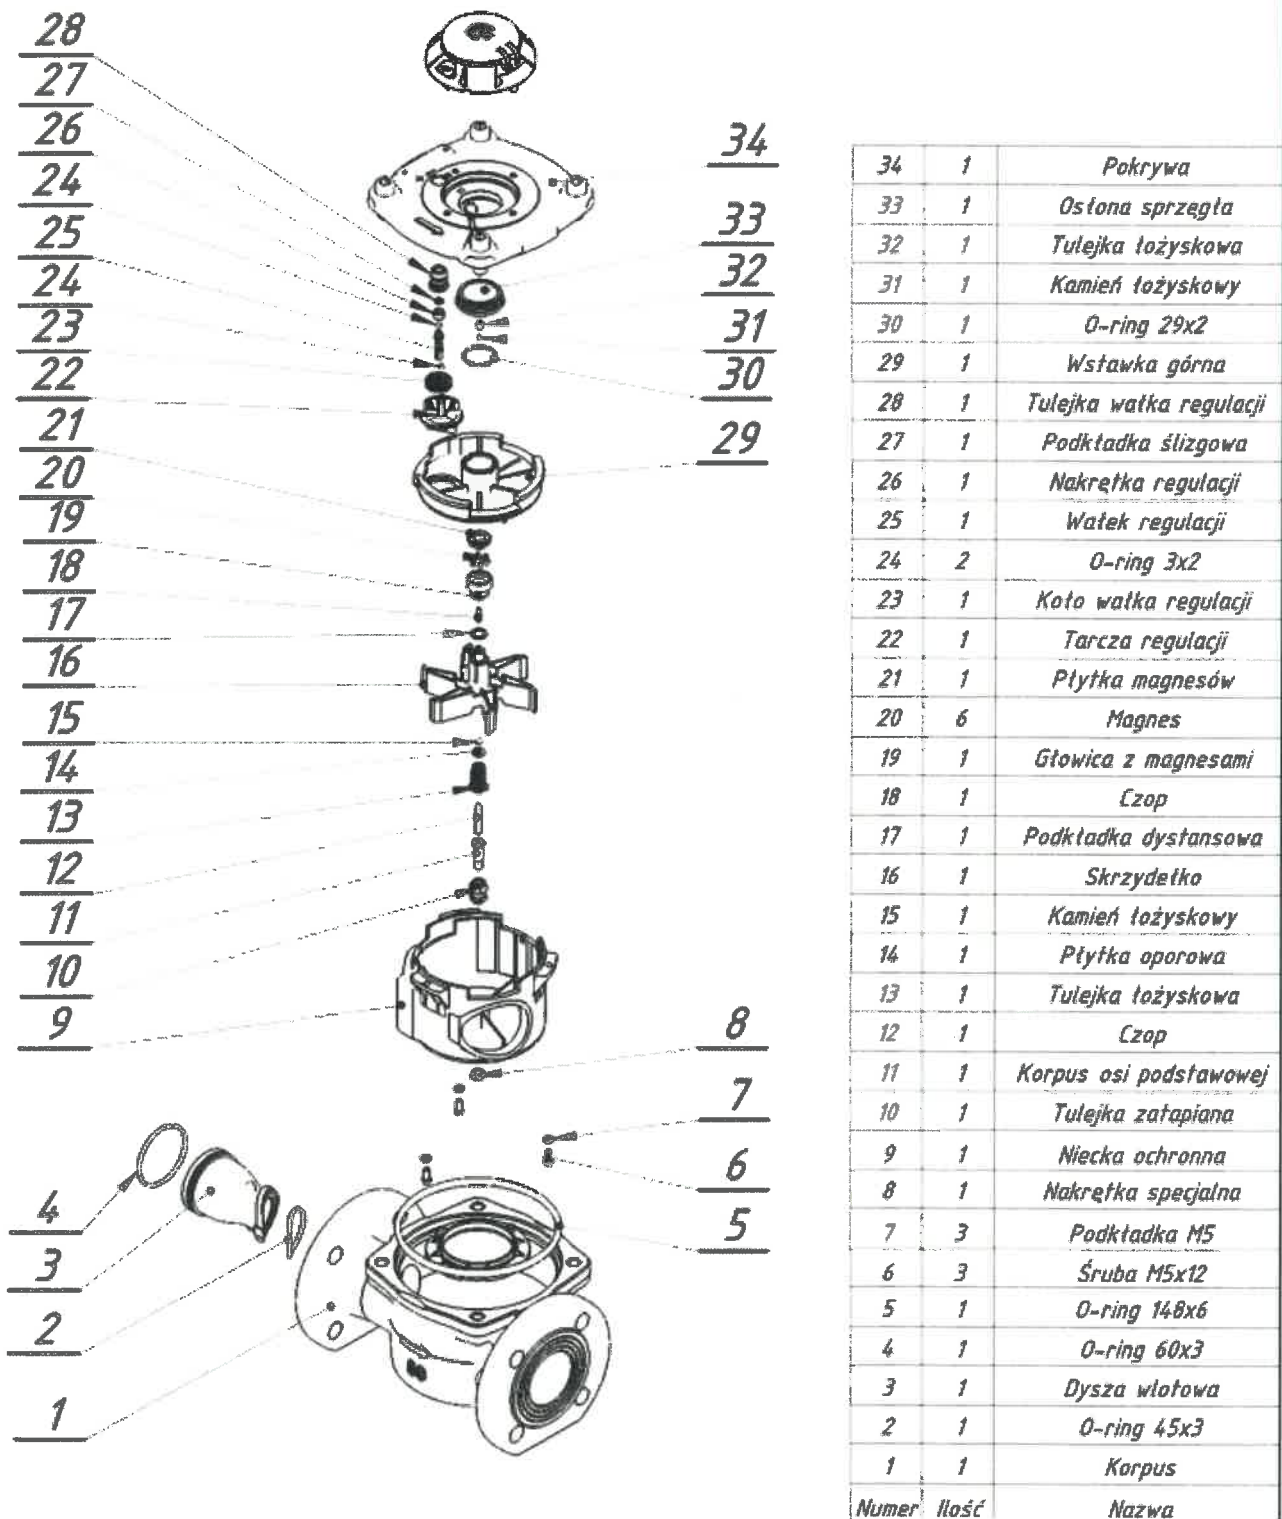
Illustrative exploded view of water meter type JS50 to JS100
